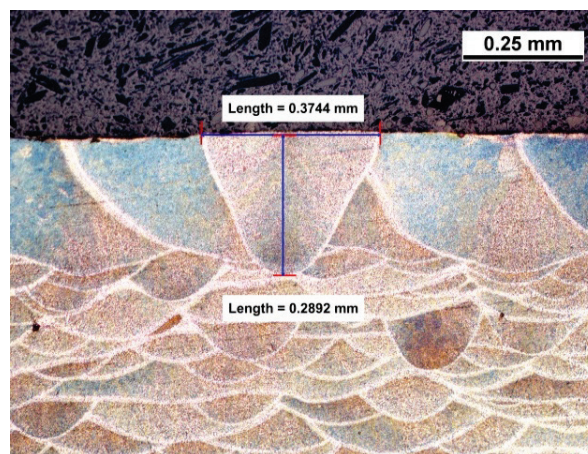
Example of keyhole weld at (340 W, 600 mm/sec).
